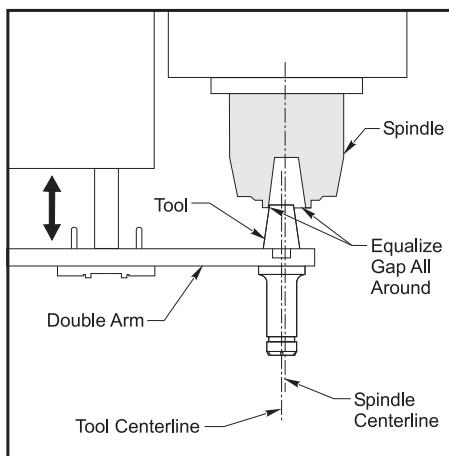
Double Arm to Spindle Center Alignment, along the Y-axis.
